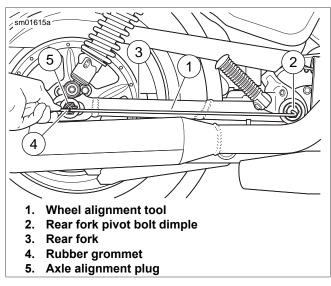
Checking Wheel Alignment Using Wheel Alignment Tool: XL Models
